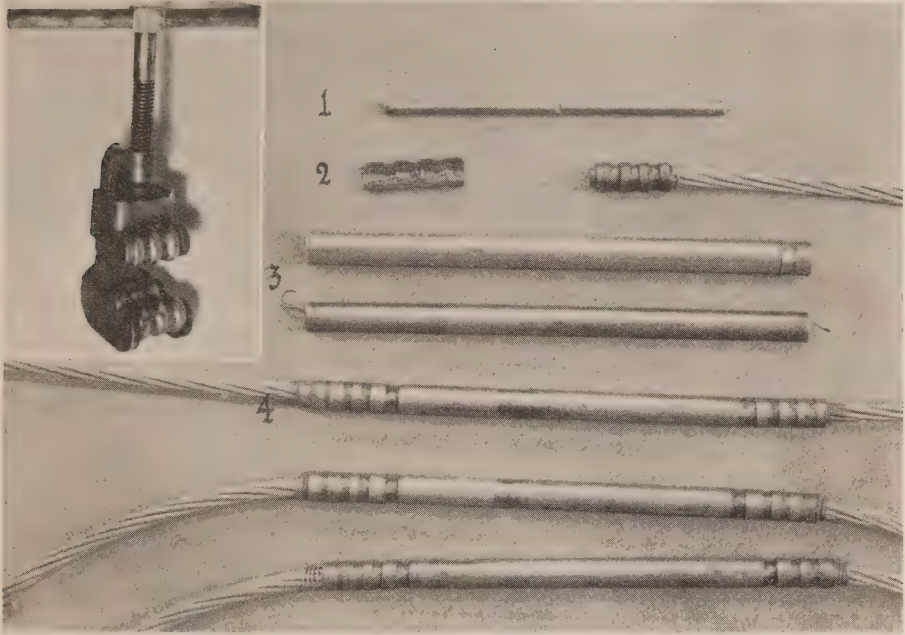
Rolled type of joint.—(1) Steel sleeve with piano wire coil; (2) Sleeve cut after rolling; (3) Tinned copper tube fitted inside with coiled brass wire; (4) Completed Sleeve. Insert—Type of roller used.
